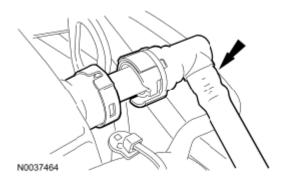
Locating Crankcase Vent Tube Courtesy of FORD MOTOR CO.
